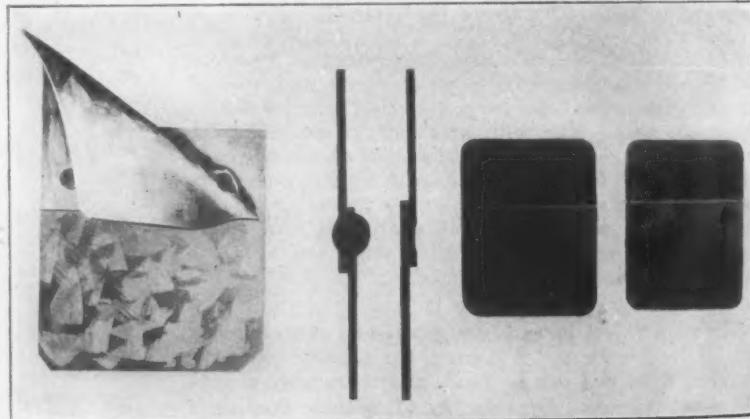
Front and Back of Spot Weld; Welding of Galvanized Sheets.
